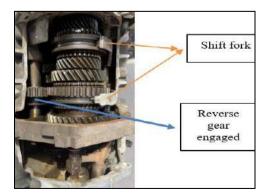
This is a diagram of how the reverse gear is getting engaged from the lever.
